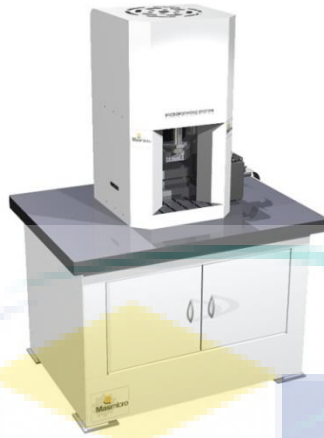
A bench-top micro-sheet-forming machine, designed by the University of Strathclyde
